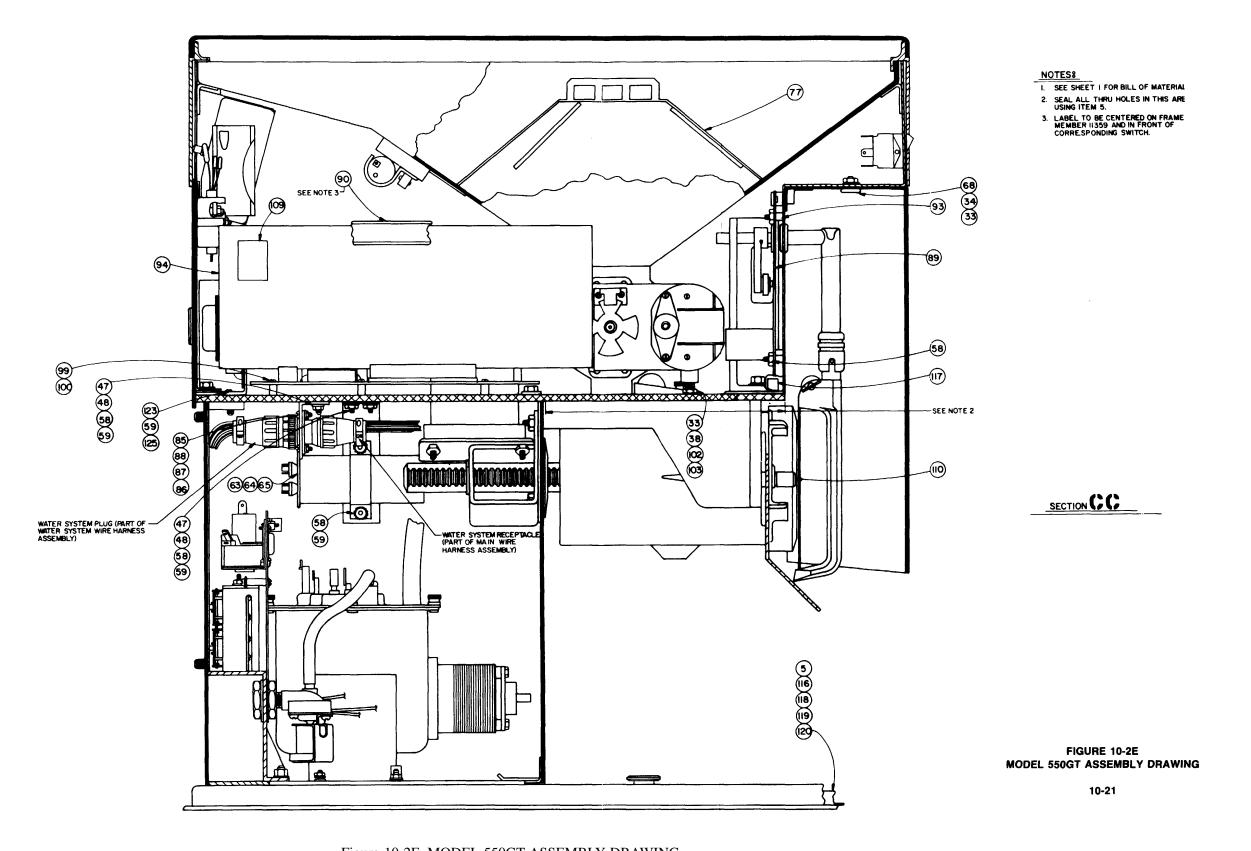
E MODEL 550GT ASSEMBLY DRAWING
